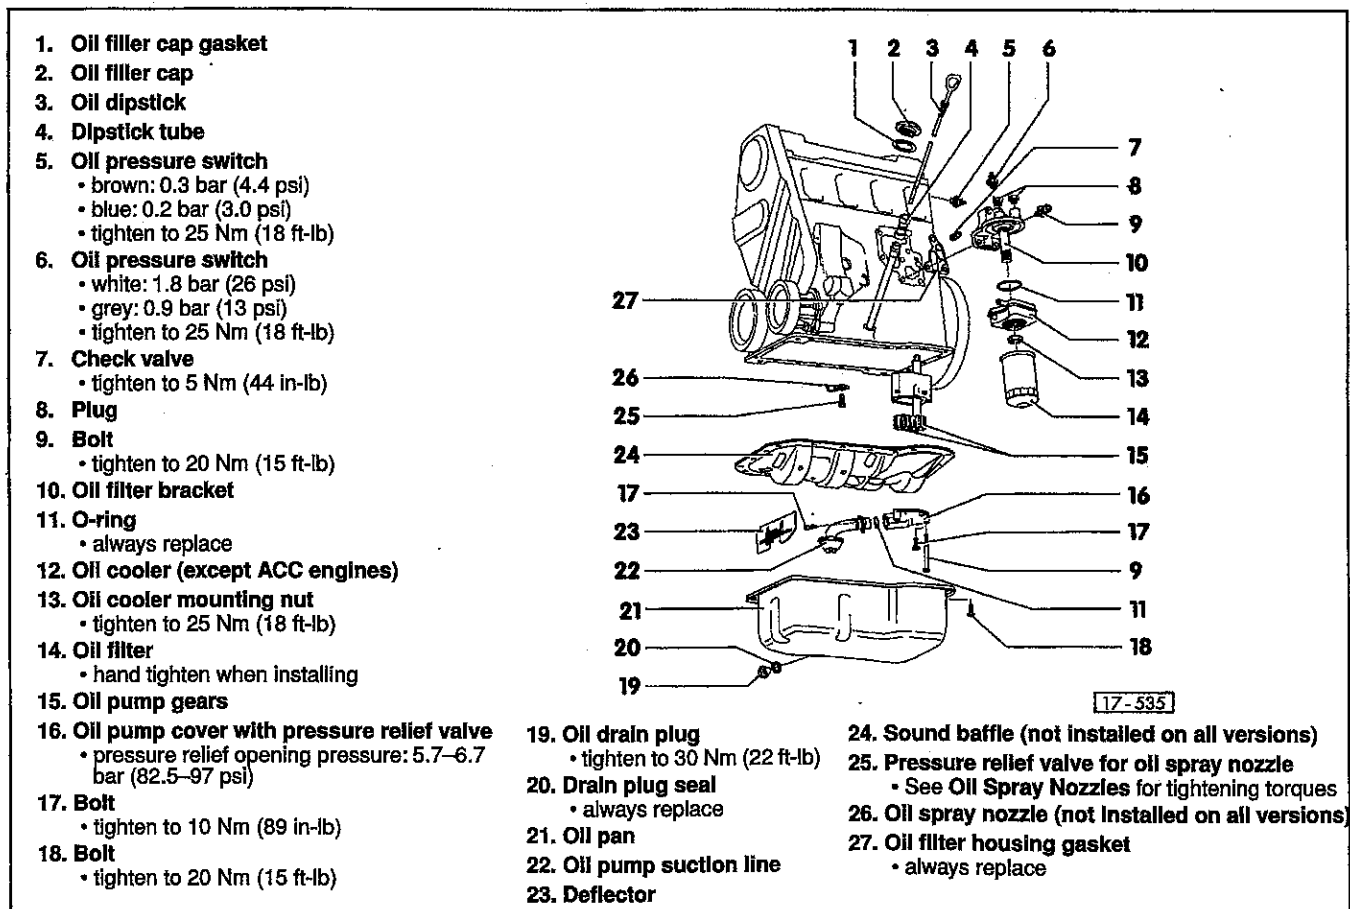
Exploded view of lubrication system on ABA (2.0 liter) engine. Lubrication system on other 4-cylinder engines is similar.
